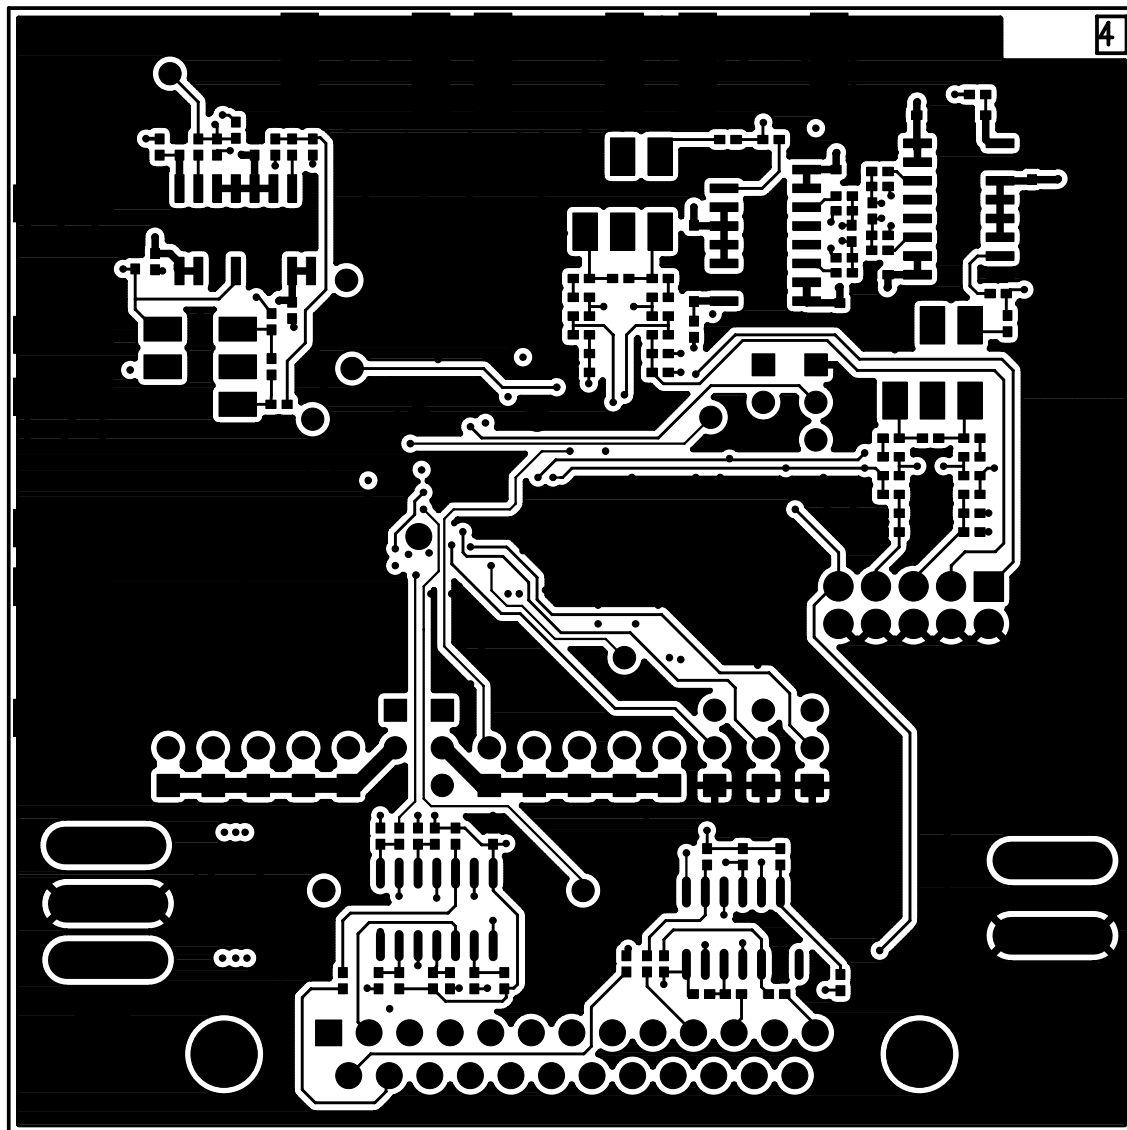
MAX2769/MAX2769B/MAX2769C EV Kit PCB Layout—Bottom Layer Metal
